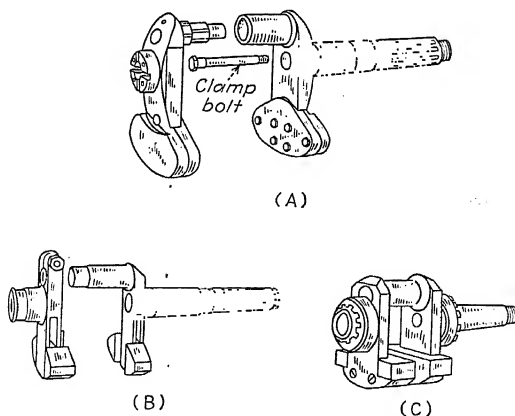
General arrangement of typical radial-engine crankshafts. (A) General arrangement of the Pratt and Whitney Wasp two-piece crankshaft. (B) General arrangement of the Wright Whirlwind two-piece crankshaft. (C) General arrangement of the LeBlond one-piece crankshaft.
